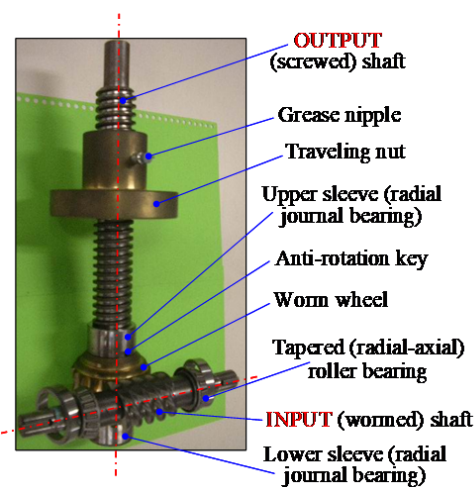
Photograph of the input and output shafts of the designed SWGMT, engaged via the worm-gear
